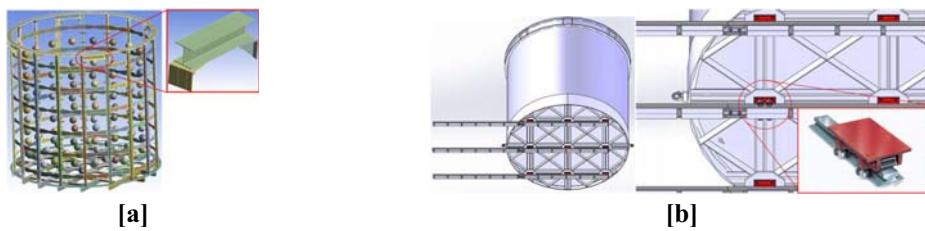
a) Lifting lug on support structure without end cap including zoomed image and b) Roller system for the motion of the tank, zoom view of the rollers & image of actual roller
